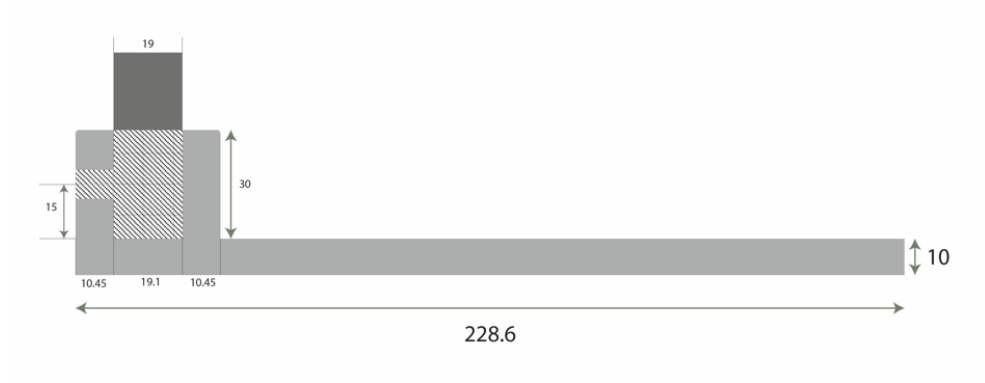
Schematic diagram of the mounting plate from the side view. All dimensions are in mm.
